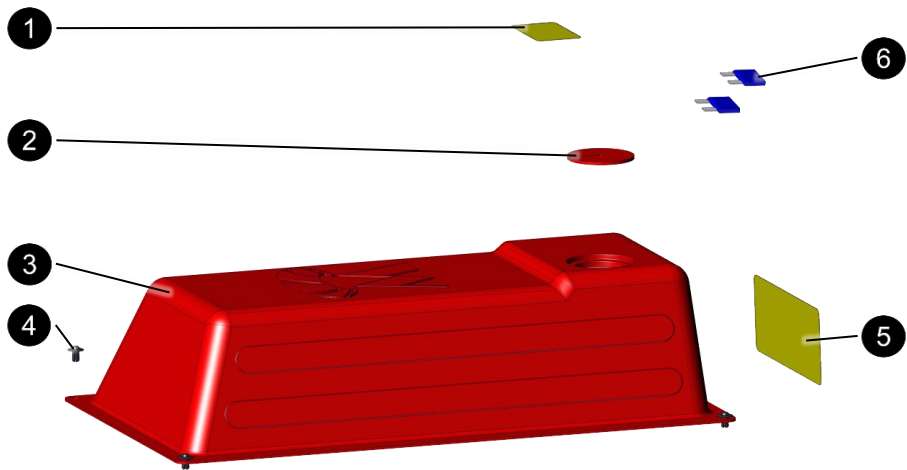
Spare parts for theWR 870 battery / battery PRO drive unit
